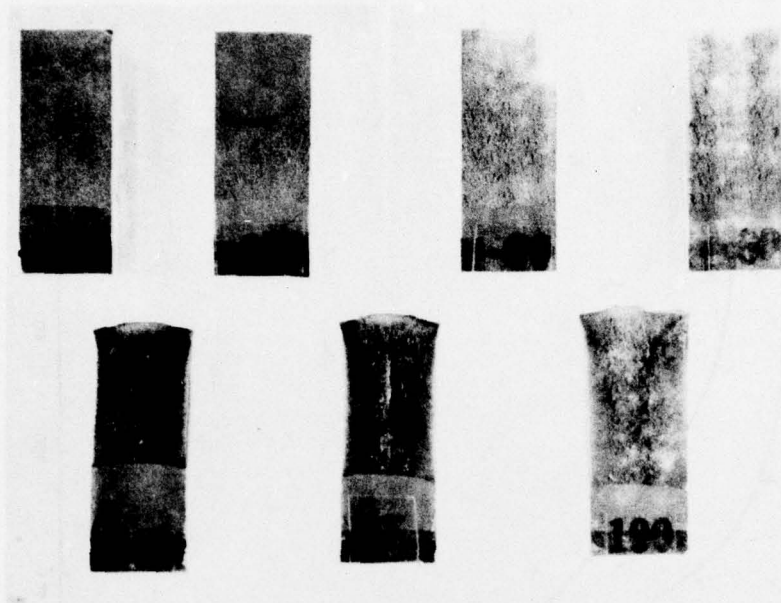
Fracture surfaces of fatigue precracked base plate specimens tested at the temperatures indicated ($^{\circ}\text{C}$); (WR orientation).
